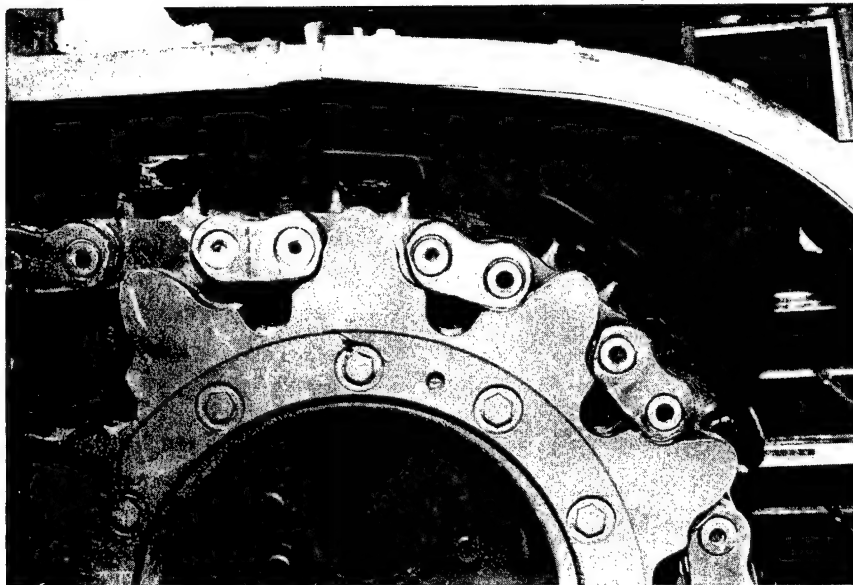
Track and sprocket misalignment and excessive end connector wear (250 miles).
